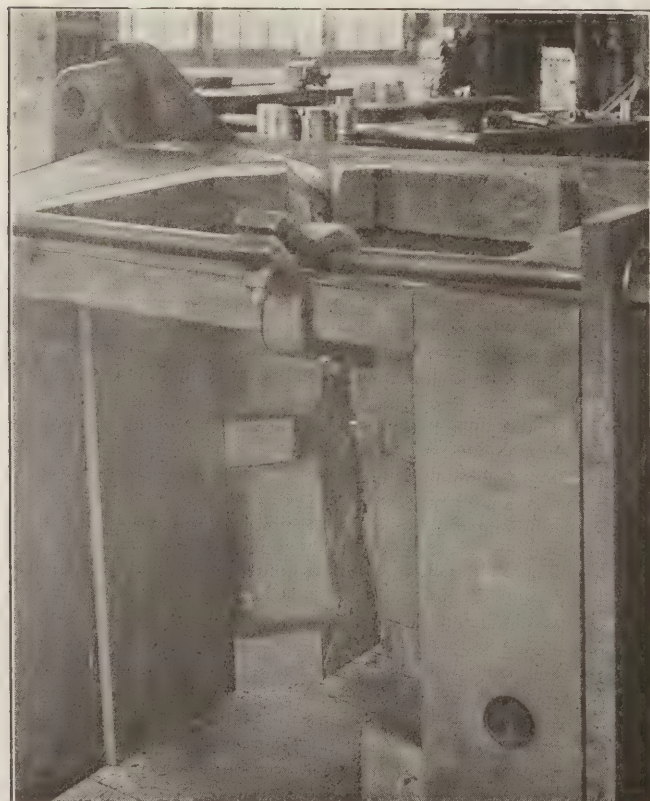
HOLDING IN PLACE PARTS TO BE WELDED
